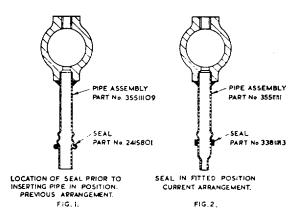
Showing location of "O" Ring prior to fitting Rocker Shaft.
